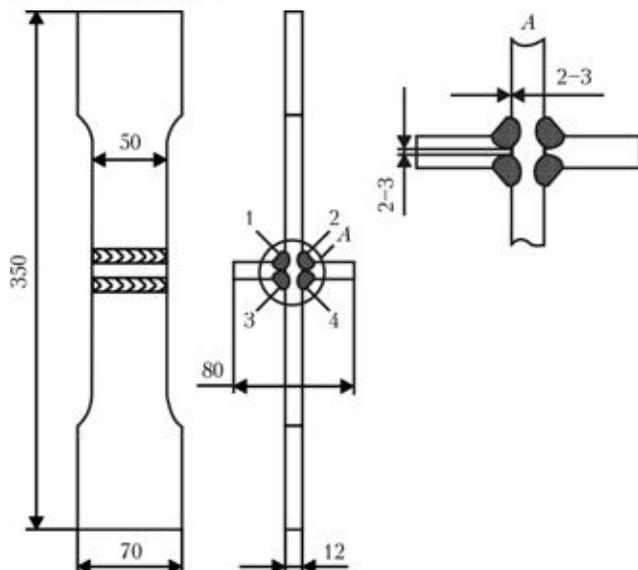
Shape and dimensions of specimens of T-joints from low-alloyed steels
